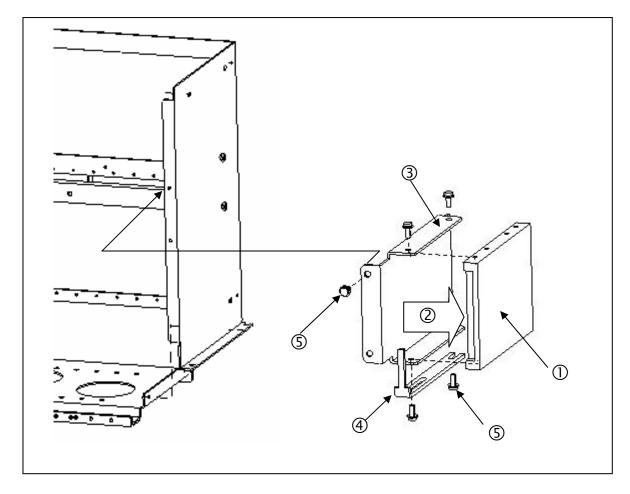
CPU Board Assembly, SSD
